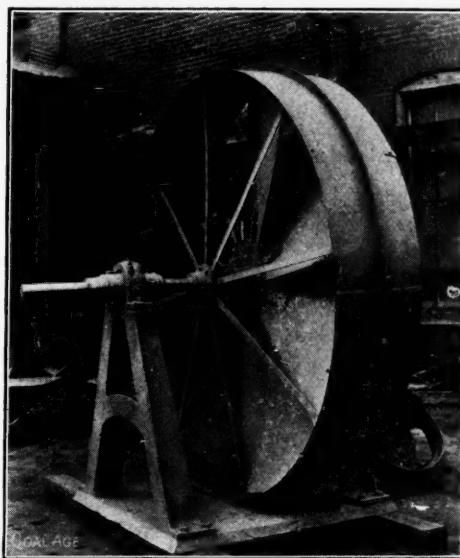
AN 8-FT. J. C. STINE FAN WITH HYATT ROLLER BEARINGS
